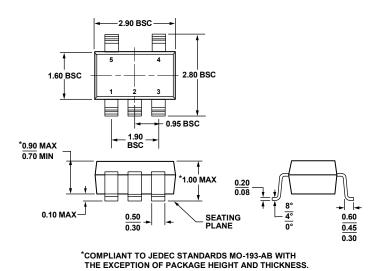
5-Lead Thin Small Outline Transistor Package [TSOT-23] (UJ-5) Dimensions shown in millimeters
